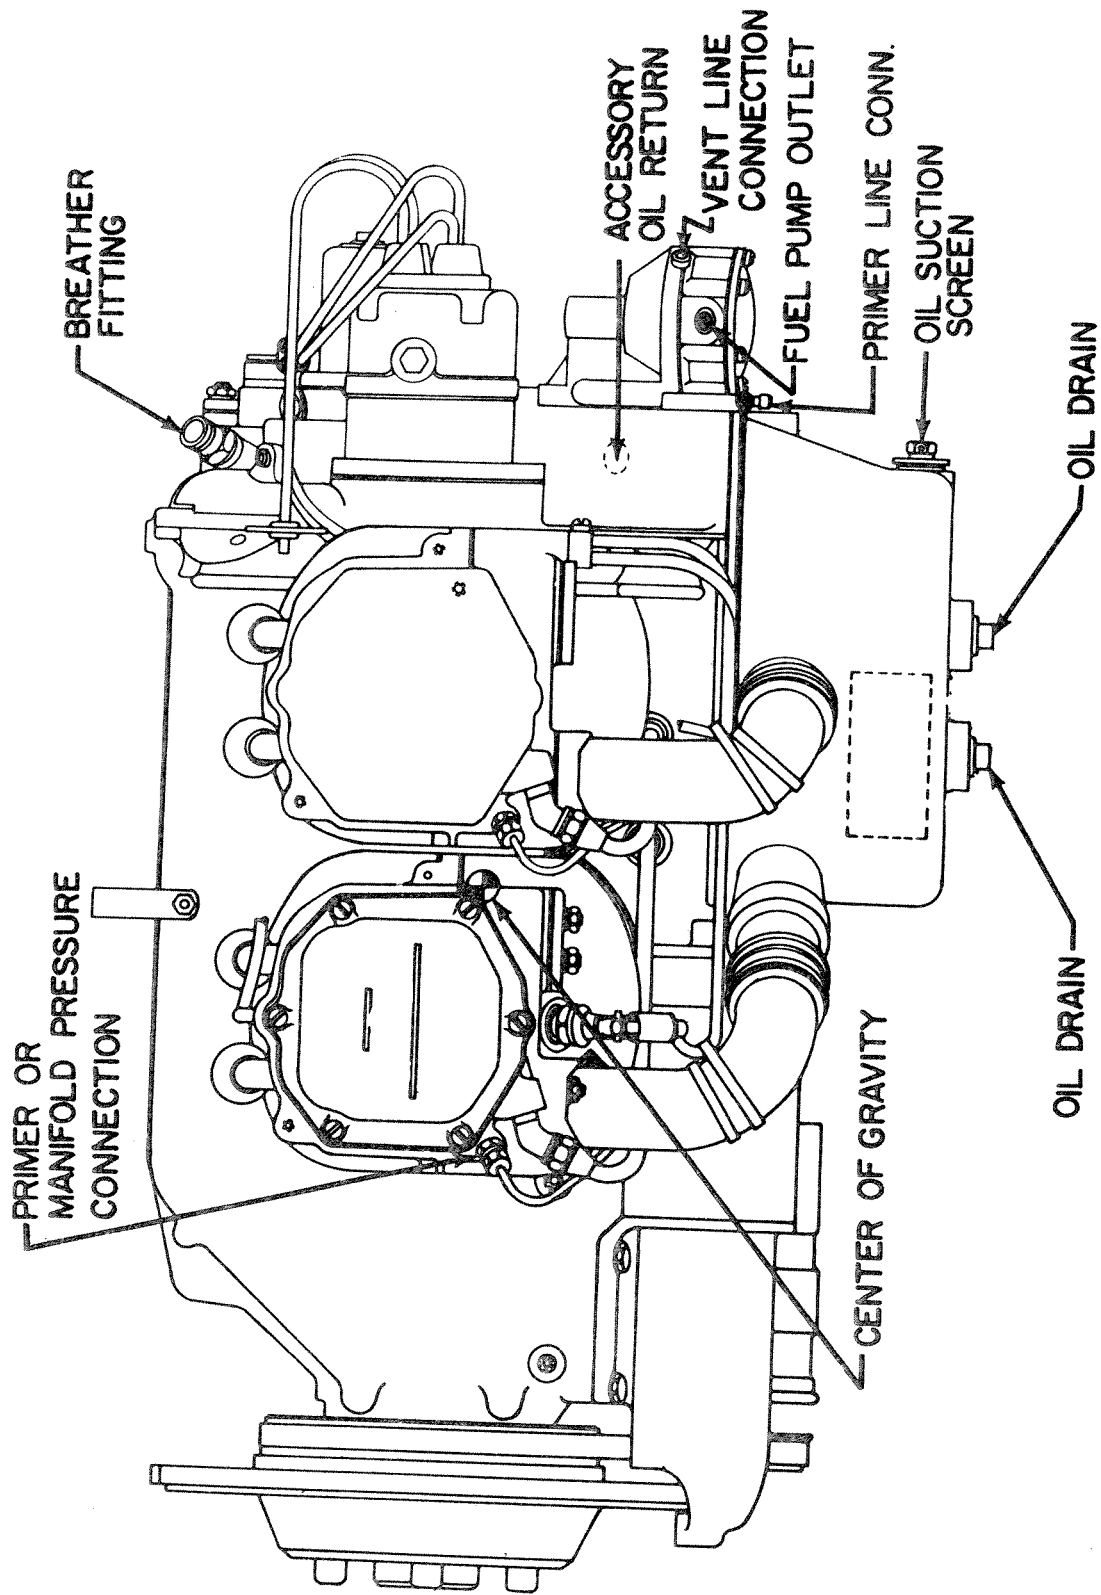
Installation Drawing Left Side View - Typical O-320-D, -E Series
